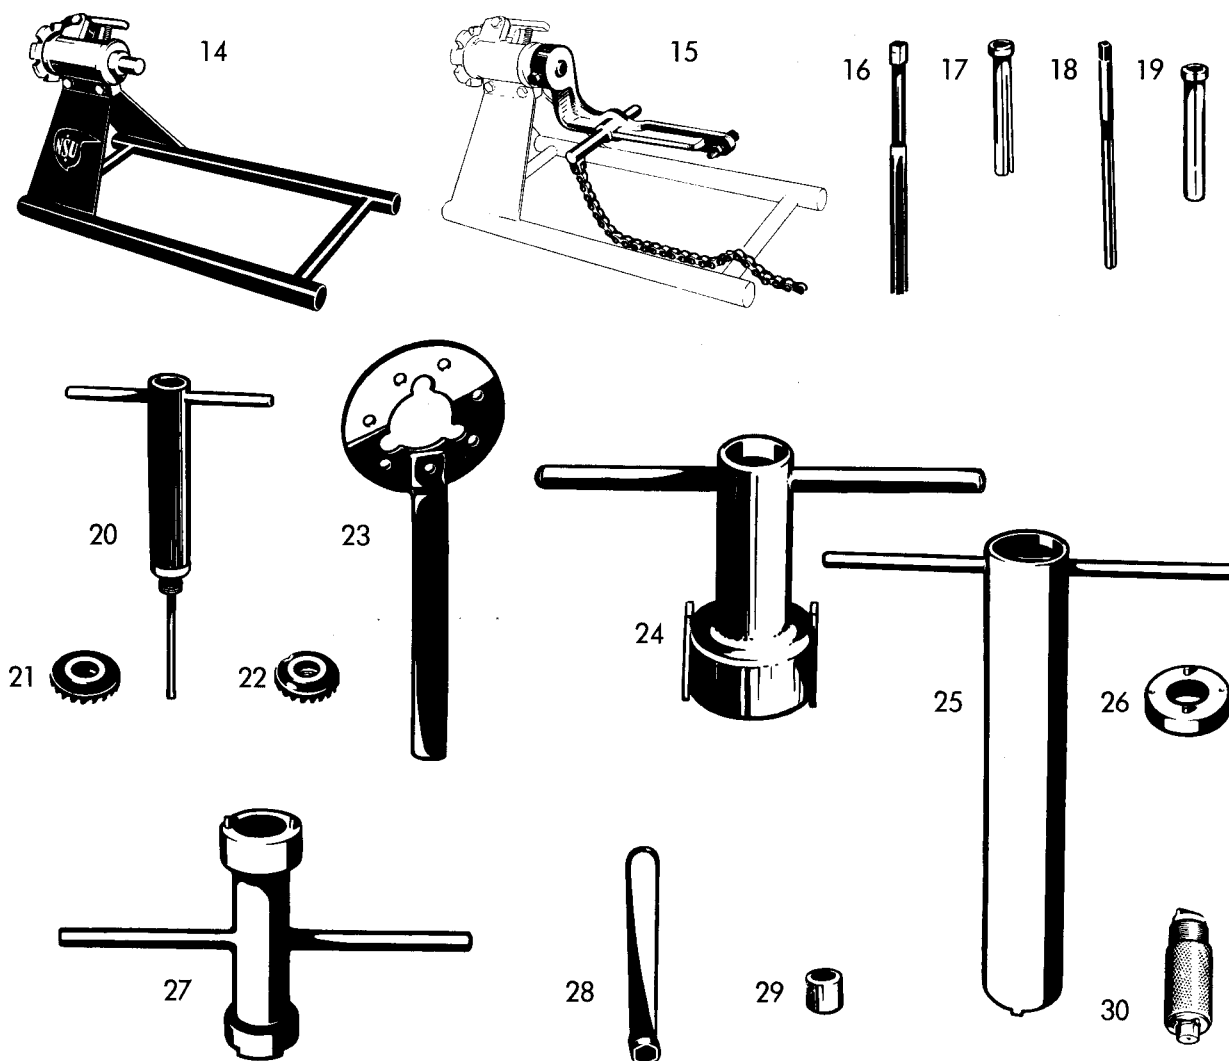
1 Assembly stand, jig	All	048 422 000
